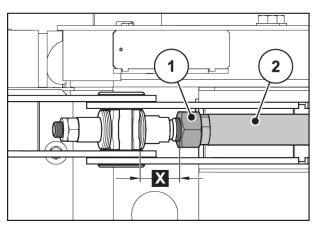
Changing the holding tension on the 2nd hydraulic cylinder
